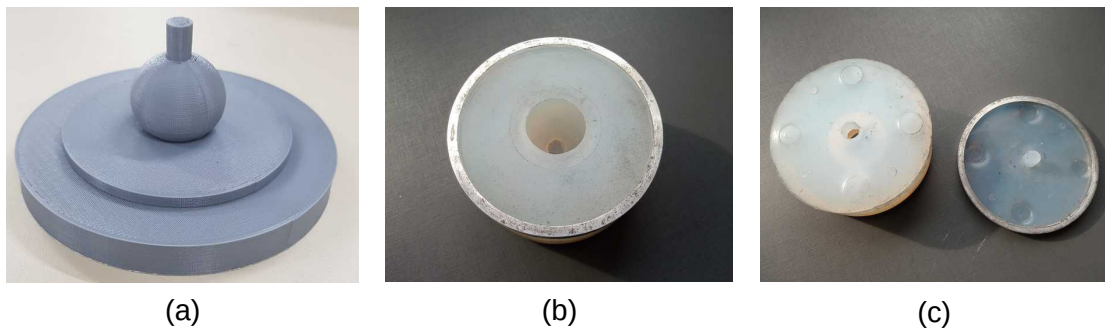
Rubber parts manufactured for RMP: (a) Auxiliary 3D-printed part, (b) bottom view of the rubber mold, and (c) top view of the rubber mold and cap.
